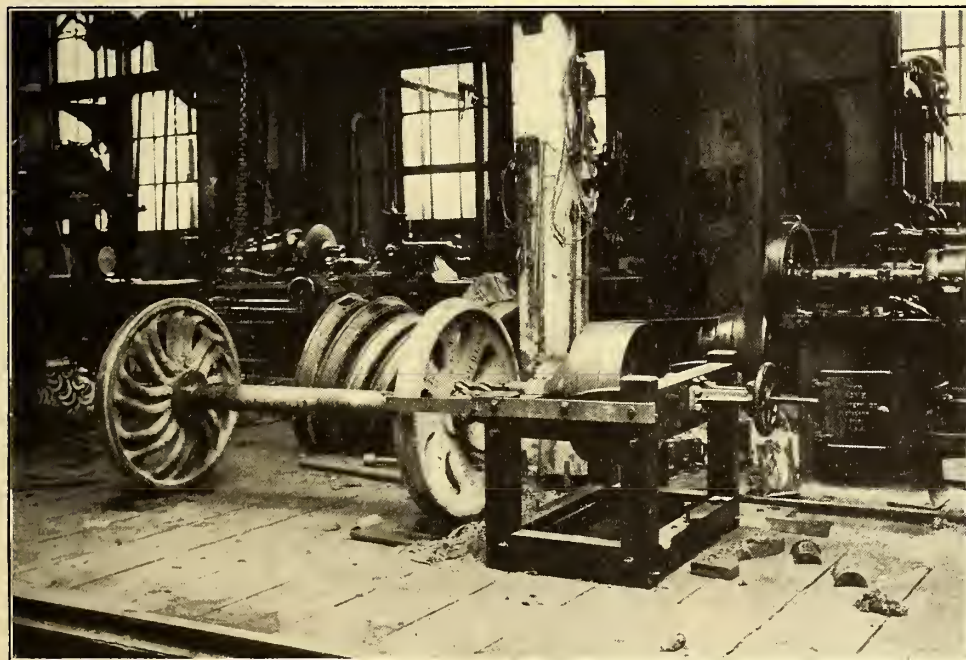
MACHINE FOR DRILLING THE HUBS OF CAST-IRON WHEELS
